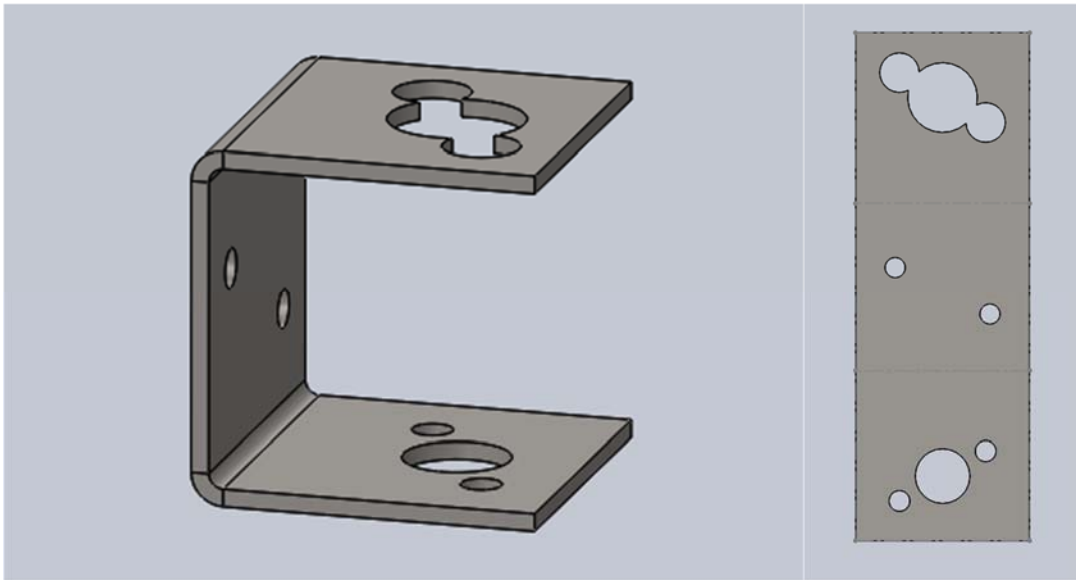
Folded and flat pattern configurations of the cylinder motor mount sheet metal part
